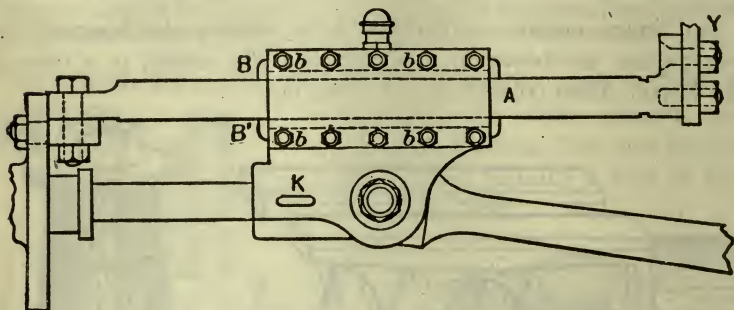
Locomotive cross head with single guide. On locomotives the piston rod is usually attached to the cross head by means of a key K. *b*, *b'*, are the gibs, and A, the guide whose outer end is bolted to a transverse piece or yoke Y.
